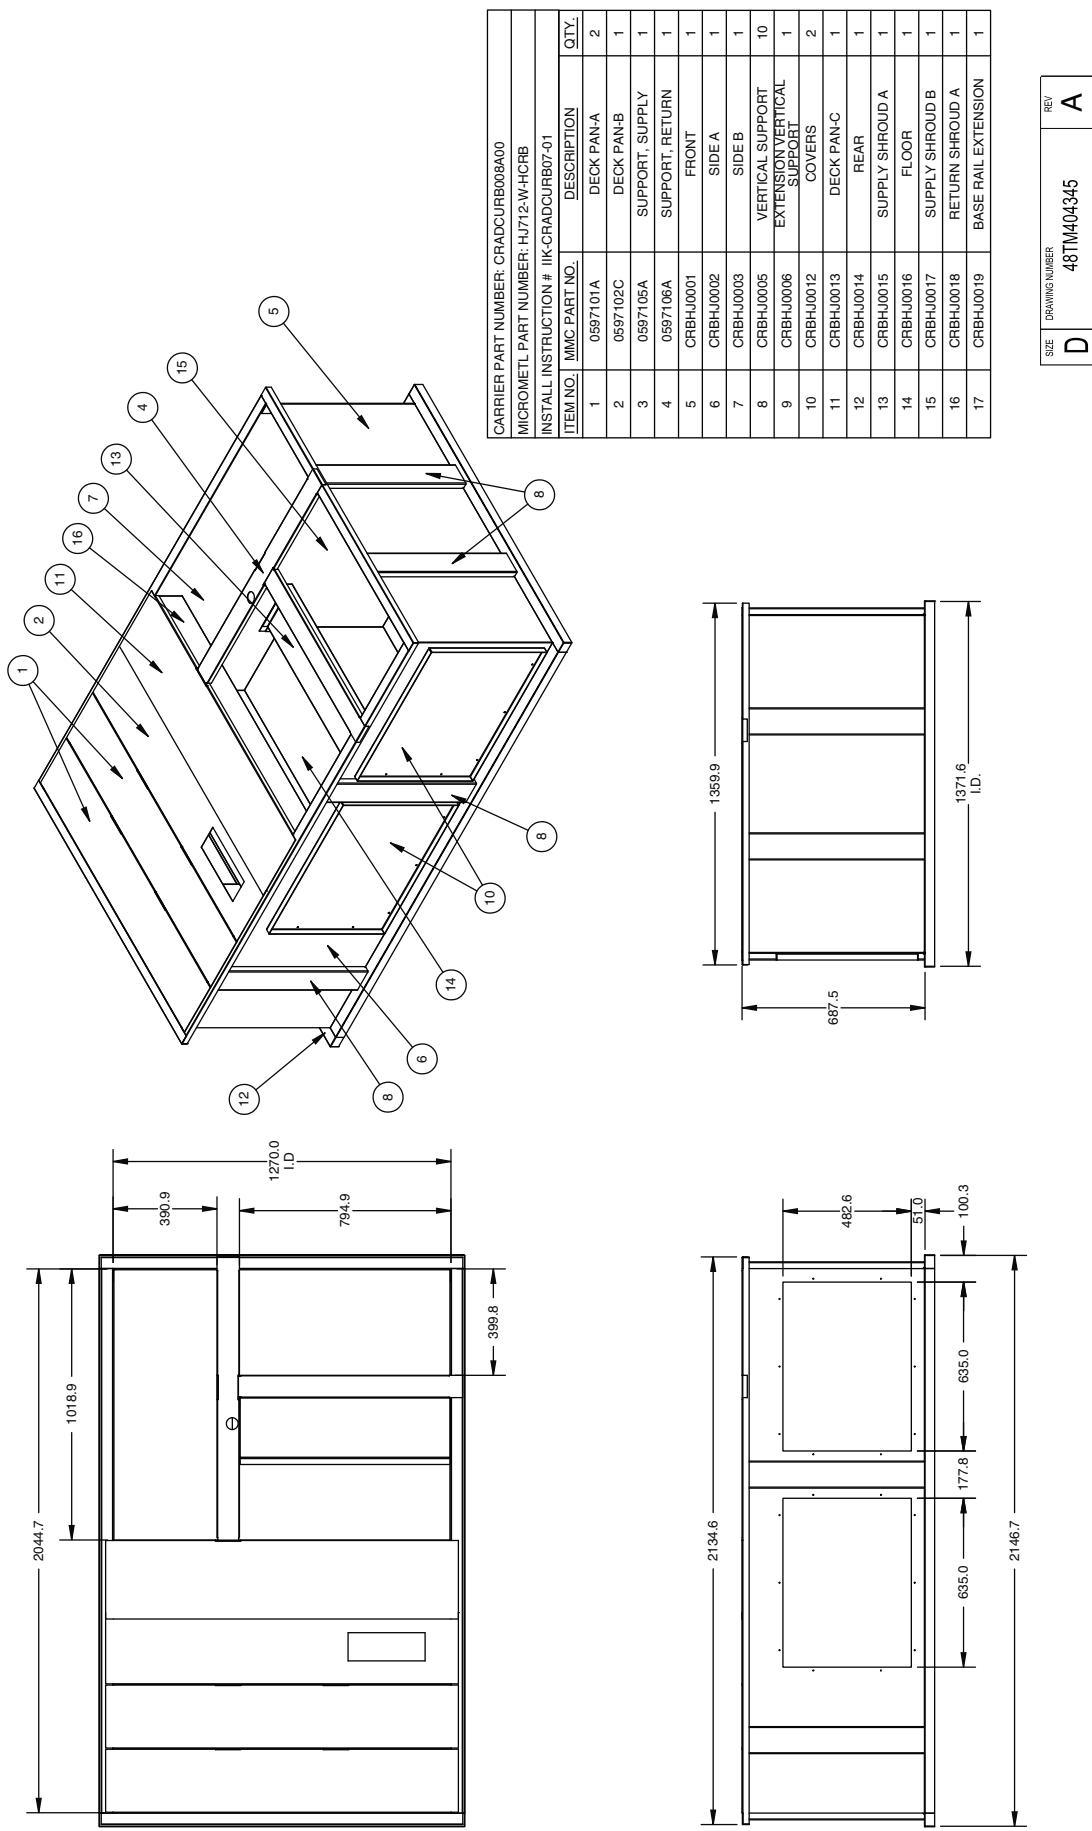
CRADCURB008A00 Horizontal Curb Adapter Assembly
